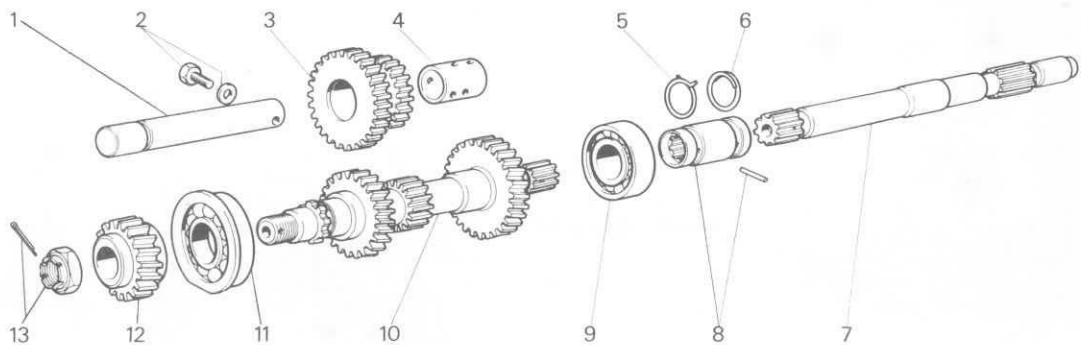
4 The components of the mainshaft and the reverse gear shaft
